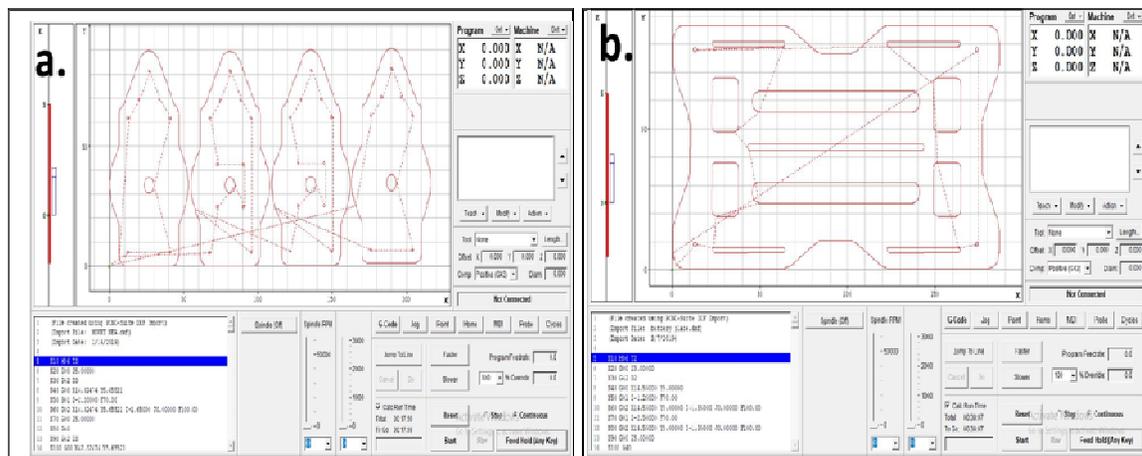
Plate design using the CNC router (a) Motor mount plate design (b) Battery plate design.
